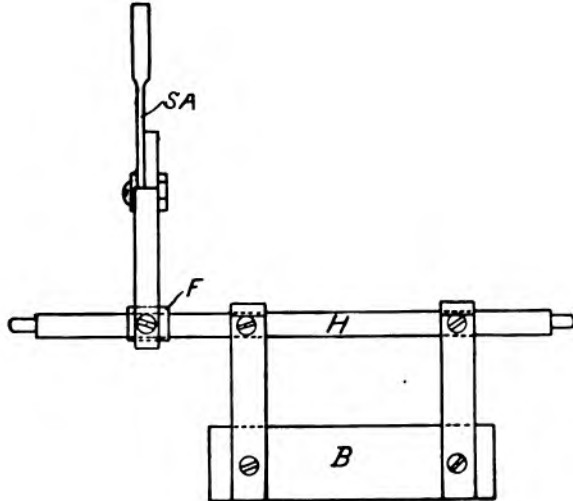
SIDE VIEW OF SYNCHRONIZER.
